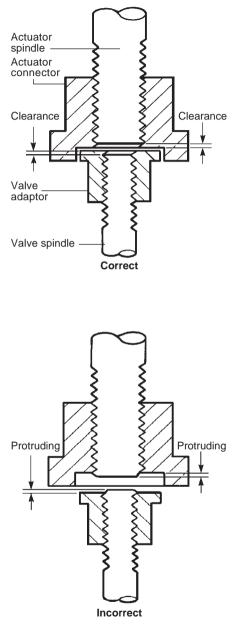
Assembly of Actuator Adaptor and Valve Connector
